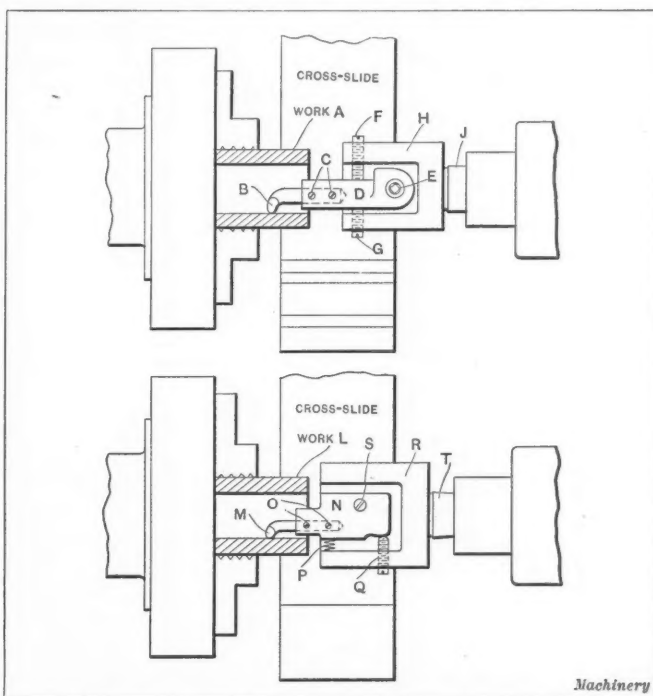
Two Types of Adjustable Boring Tools for Tool-room Work
